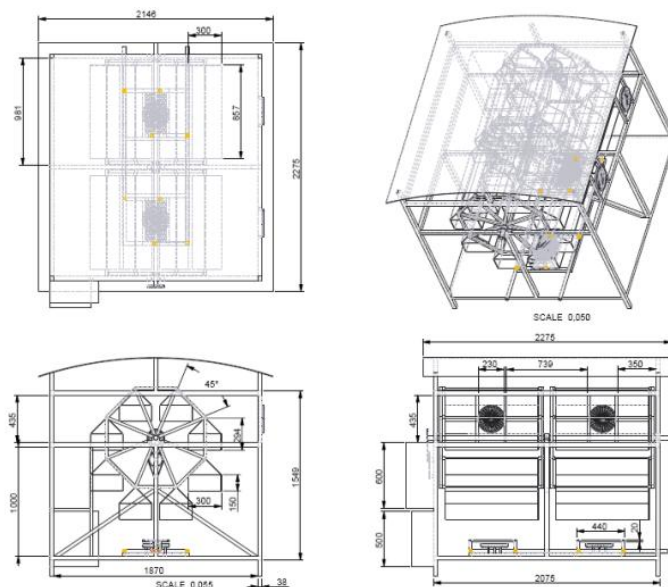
Technical drawing of automated hybrid fish cracker
